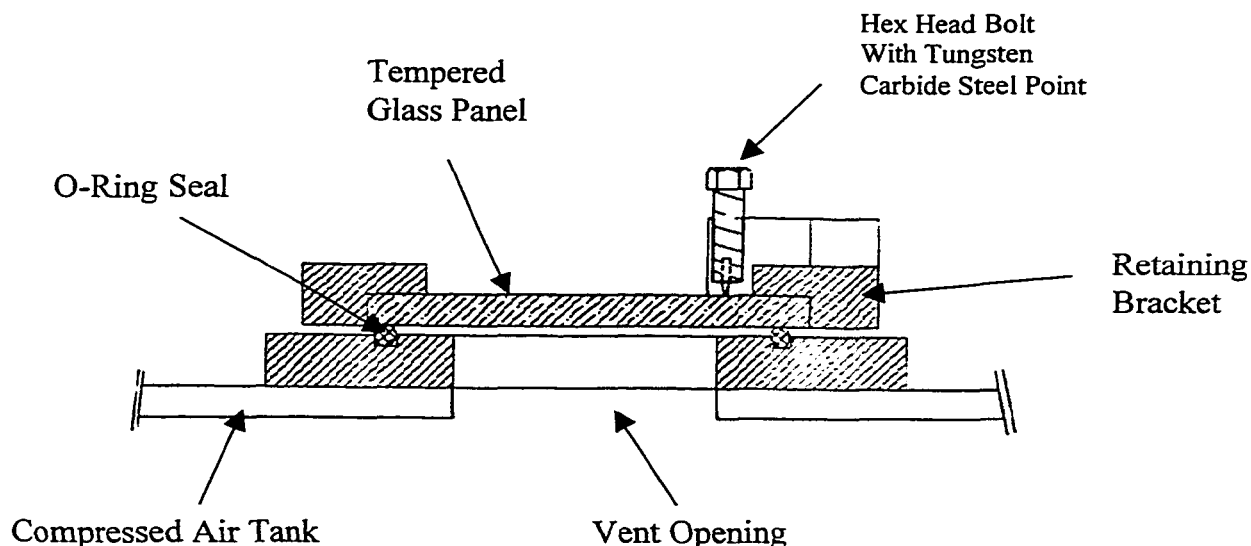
A Section View of the Experimental Configuration Used to Initiate Fracture in a Scale-Model Tempered Glass Vent Panel.
